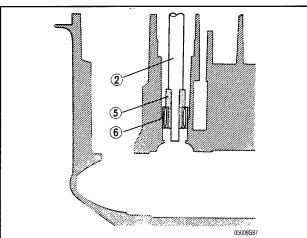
Lay the gearcase down, and insert the installer shaft into it, making sure of the position of the pinion needle bearing "6" that is being installed
